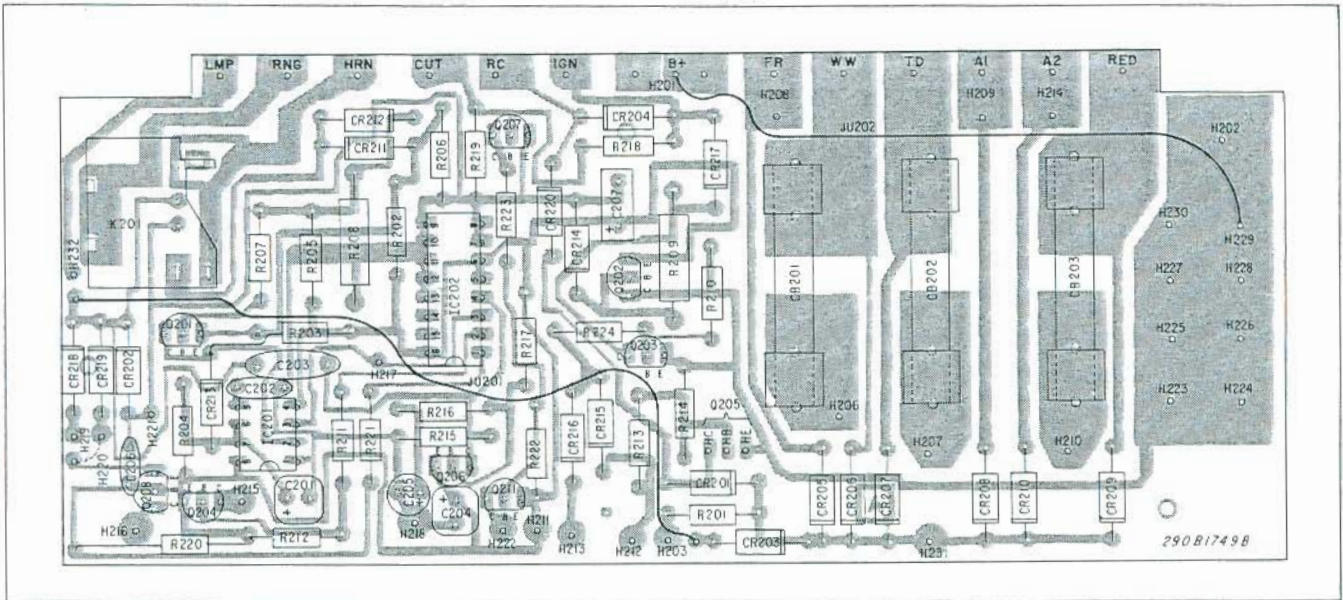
A. Model CC1 Board Assembly Control Module Parts Location Diagram (for units with SPKR label on TB1).
